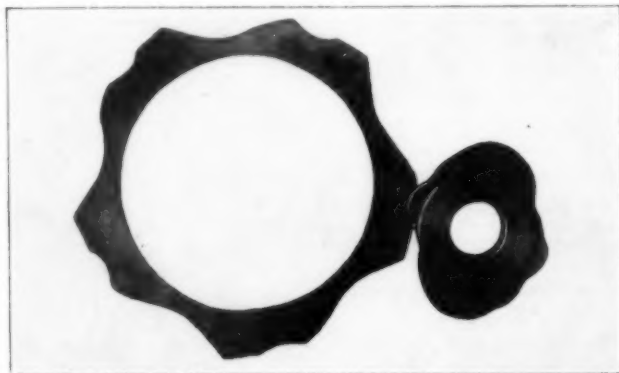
EXHAUST CAM FOR GNOME ENGINE AND CUTTER USED IN PRODUCING IT
